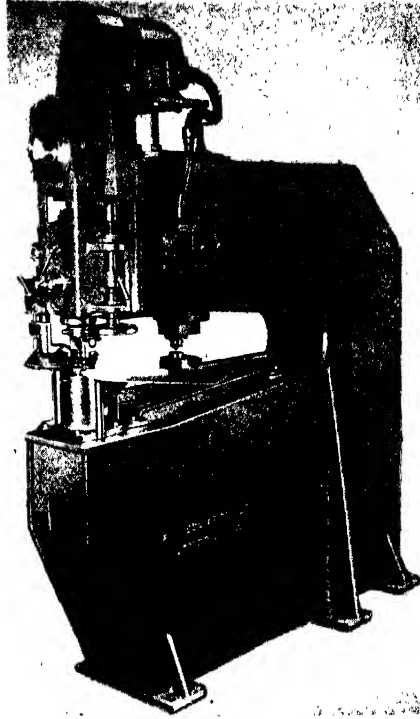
PUNCH- AND SHEAR-TYPE NIBBLER FOR CUTTING MILD STEEL UP TO $\frac{1}{4}$ IN.
